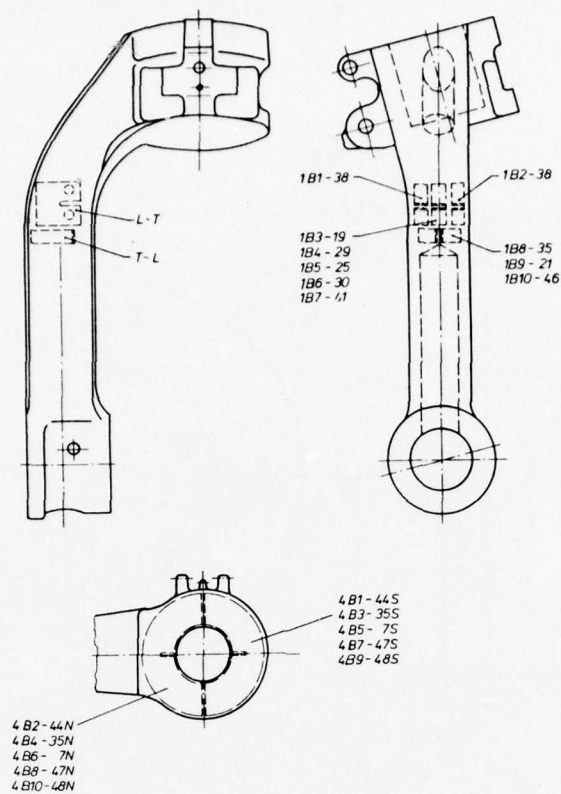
Nose Landing Gear Strut and Location of Fracture Toughness Specimens
